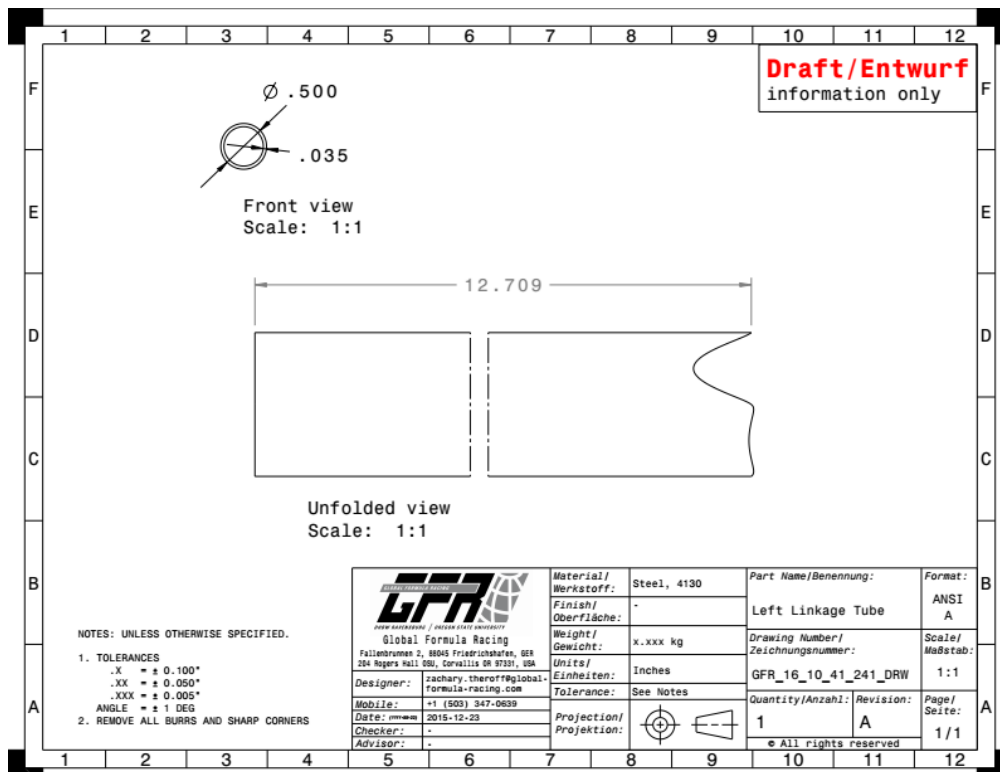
Drawing for linkage tube connecting jack bar to chassis, with coping shown at the right edge of the “Unfolded View”.
